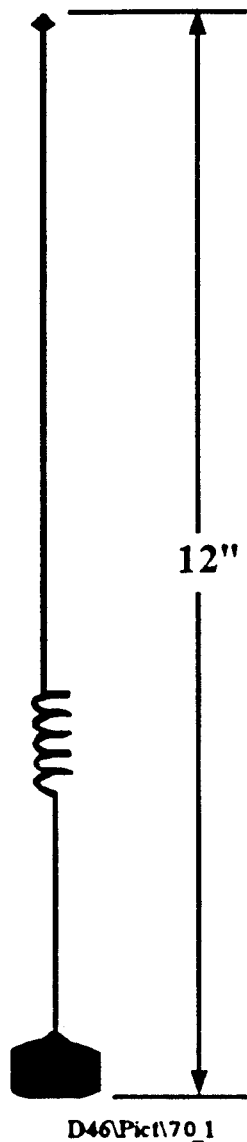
46-0070-001 Antenna dimensions (For Reference Only)
